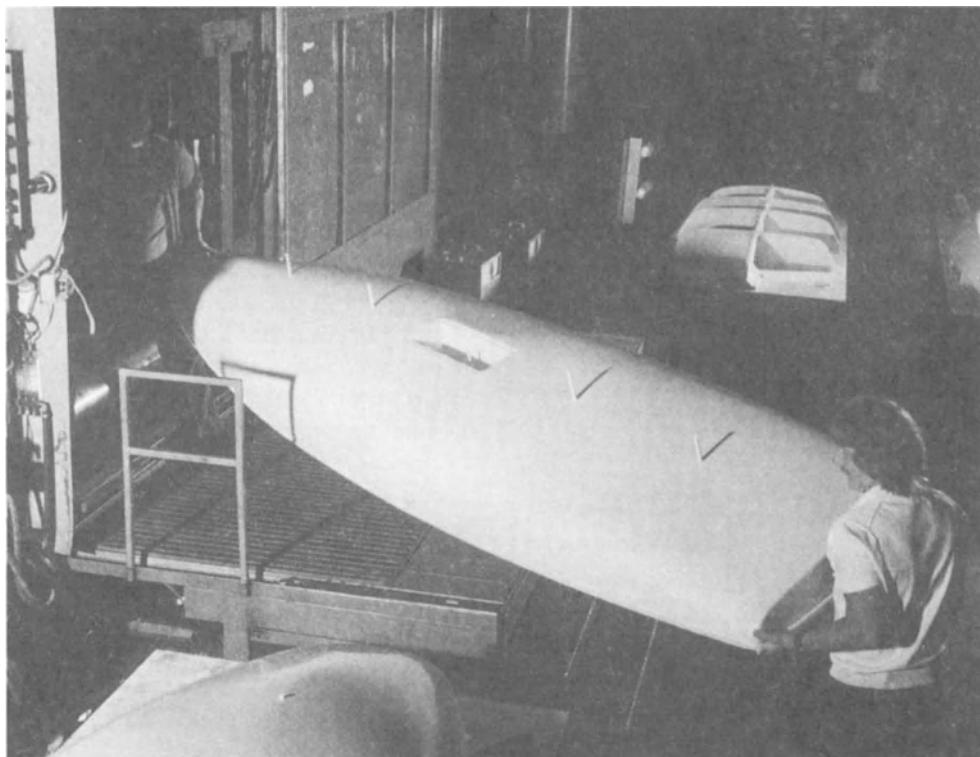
Molded boat being removed from mold before being put on a cooling frame in the background.
